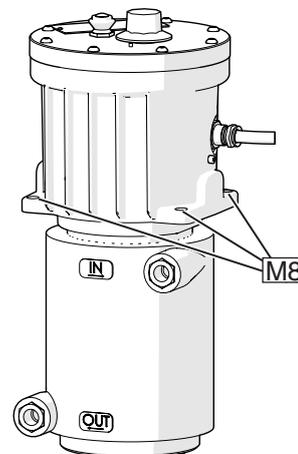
Holes for fastening the MFH to a holder (1 additional hole covered)
